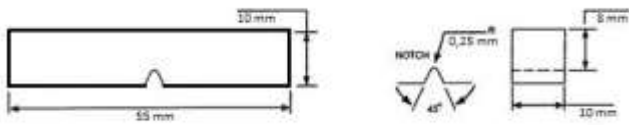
Shape and Dimension of ASTM E23 for impact testing
